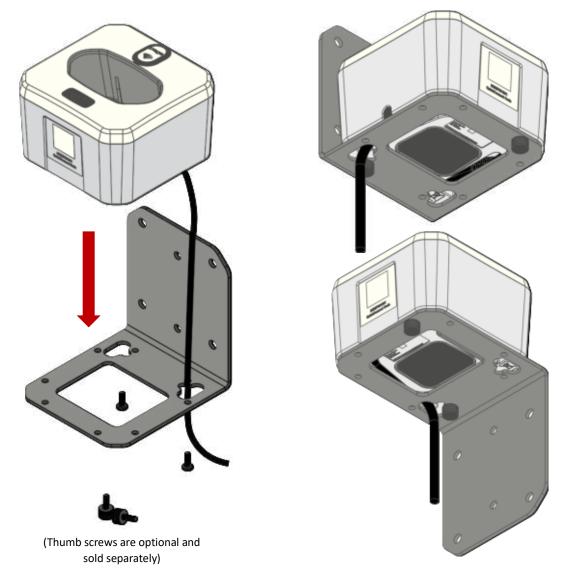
Install Charging Station with Wall Mount Bracket CRA-WMB4
